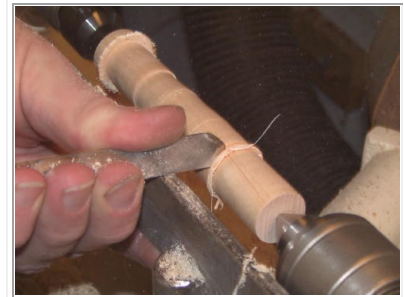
Cutting a V with the Spindlemaster. Note that the bottom edge, not the nose, is cutting.
